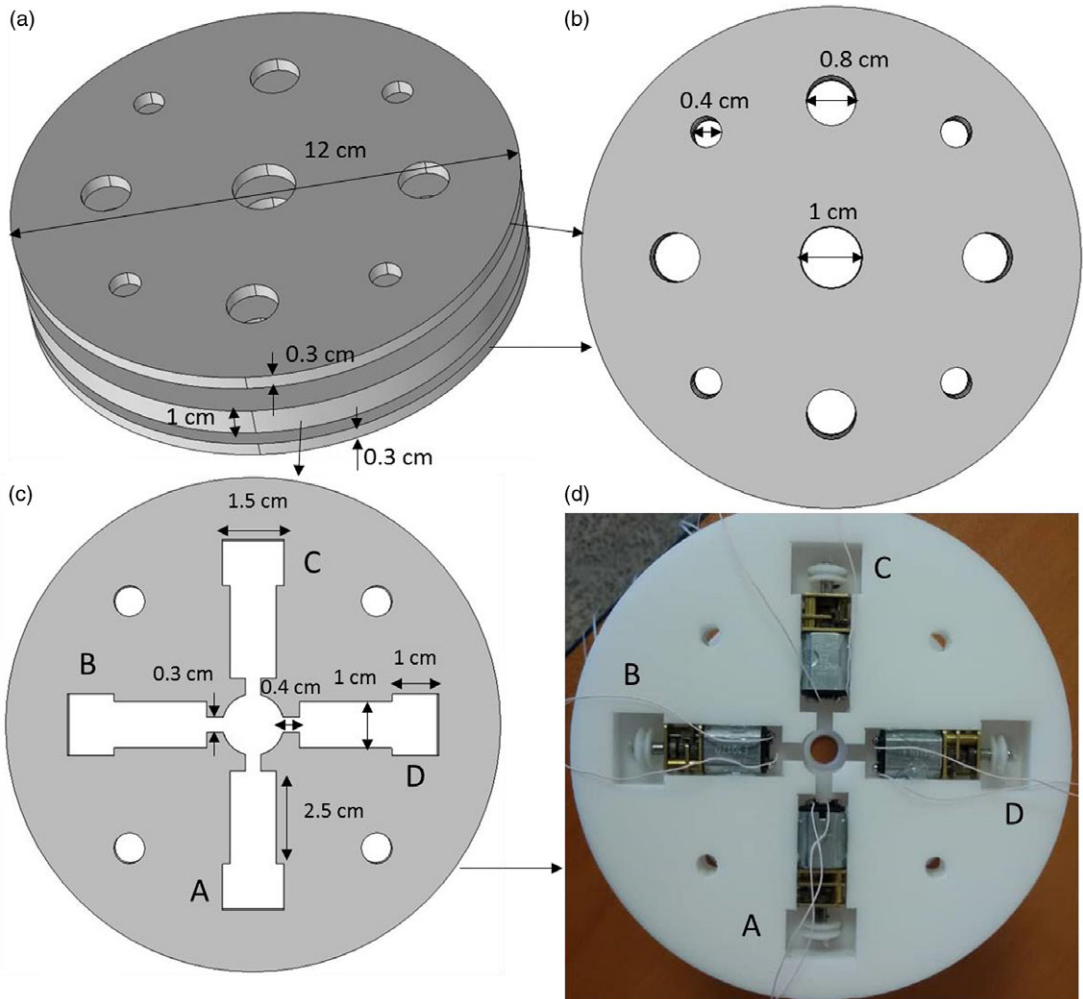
Part 4 of Fig. 2 contains the chassis and location of the four DC motors, (a) chassis construction and placement of four DC motors in it, (b) chassis top and bottom plate, (c) location of four DC motors with gearbox and pulley connected to the gearbox shaft, and (d) constructed chassis containing the four DC motors, gearboxes, and pulleys.
